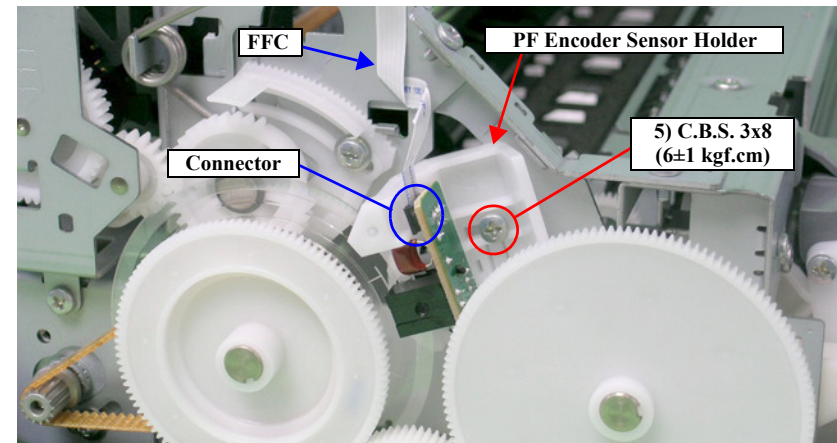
Removing the FFC and the Screw that Secures the PF Encoder Sensor Holder
